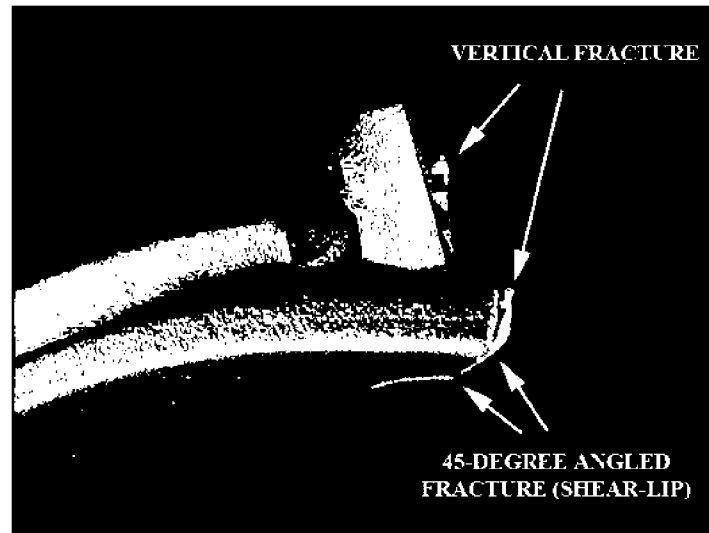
presents a close up image of the trigger bow portion of the fracture as viewed from the side angle. This image shows some fracture morphology characteristics which indicate the direction of fracture propagation. These features include a large area of straight (vertical) fracture and a small region of fracture which occurs at about 45° to the vertical fracture. This region is typically called a shear lip and represents the region of fracture in which the stress state changed from 3-dimensionally constrained to 2-dimensionally constrained – the last portion to fracture. This fracture path geometry indicates that the fracture initiated at the top of the boss or trigger bow and propagated to the bottom.
